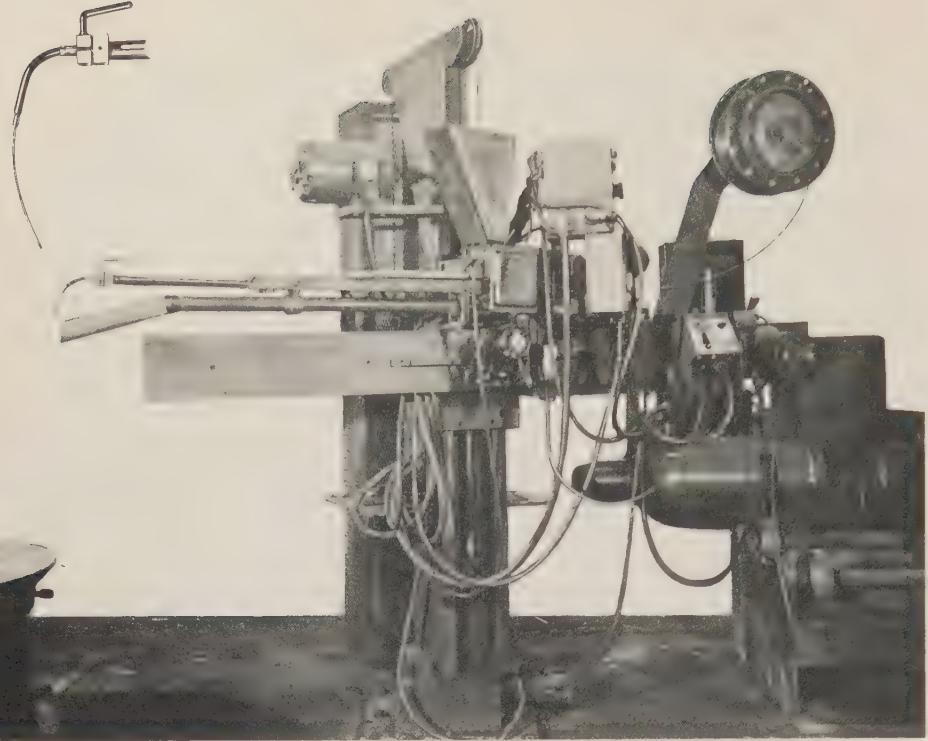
A special welding fixture was developed to facilitate the use of the submerged-arc welding process for the welding of the crankcase sub-assemblies and final assembly. The fixture allows the submerged-arc welding machine head easy access to inside circumferential welding zones and also exterior welding zones. The flux necessary for the welding operation is fed from a storage hopper positioned on top of the welding head. By the use of a bent, copper nozzle (shown inset) the welding wire is assured of entering the weld joint at the proper angle.
